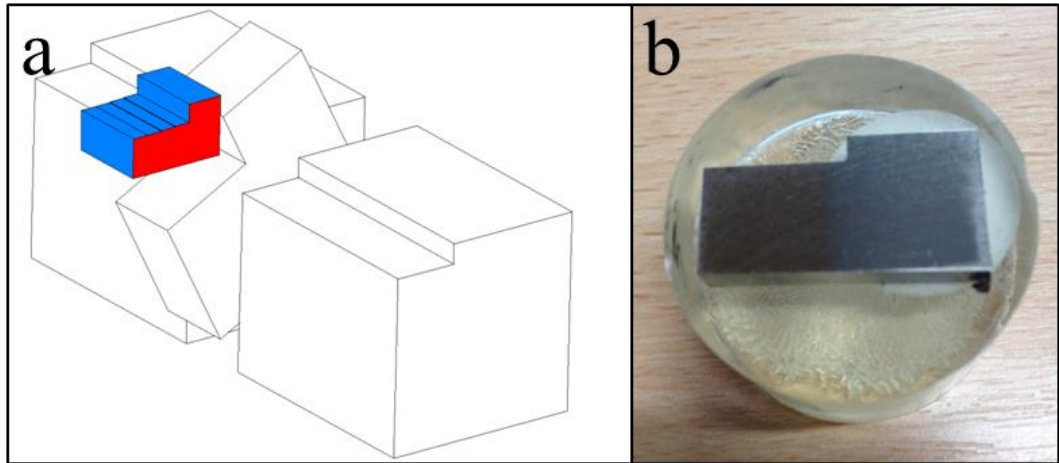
(a) Cross sectional sample of machined surfaces and (b) sample mounted in resin
